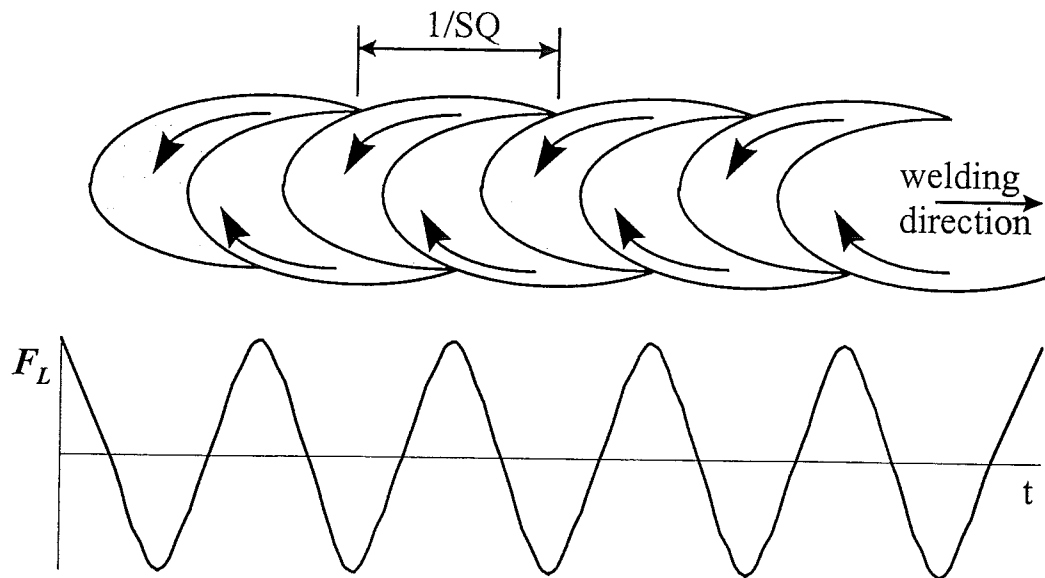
Schematic drawing of the weld bead appearance due to alternating EMS (top view) and the Lorentz force on the same distance scale.
